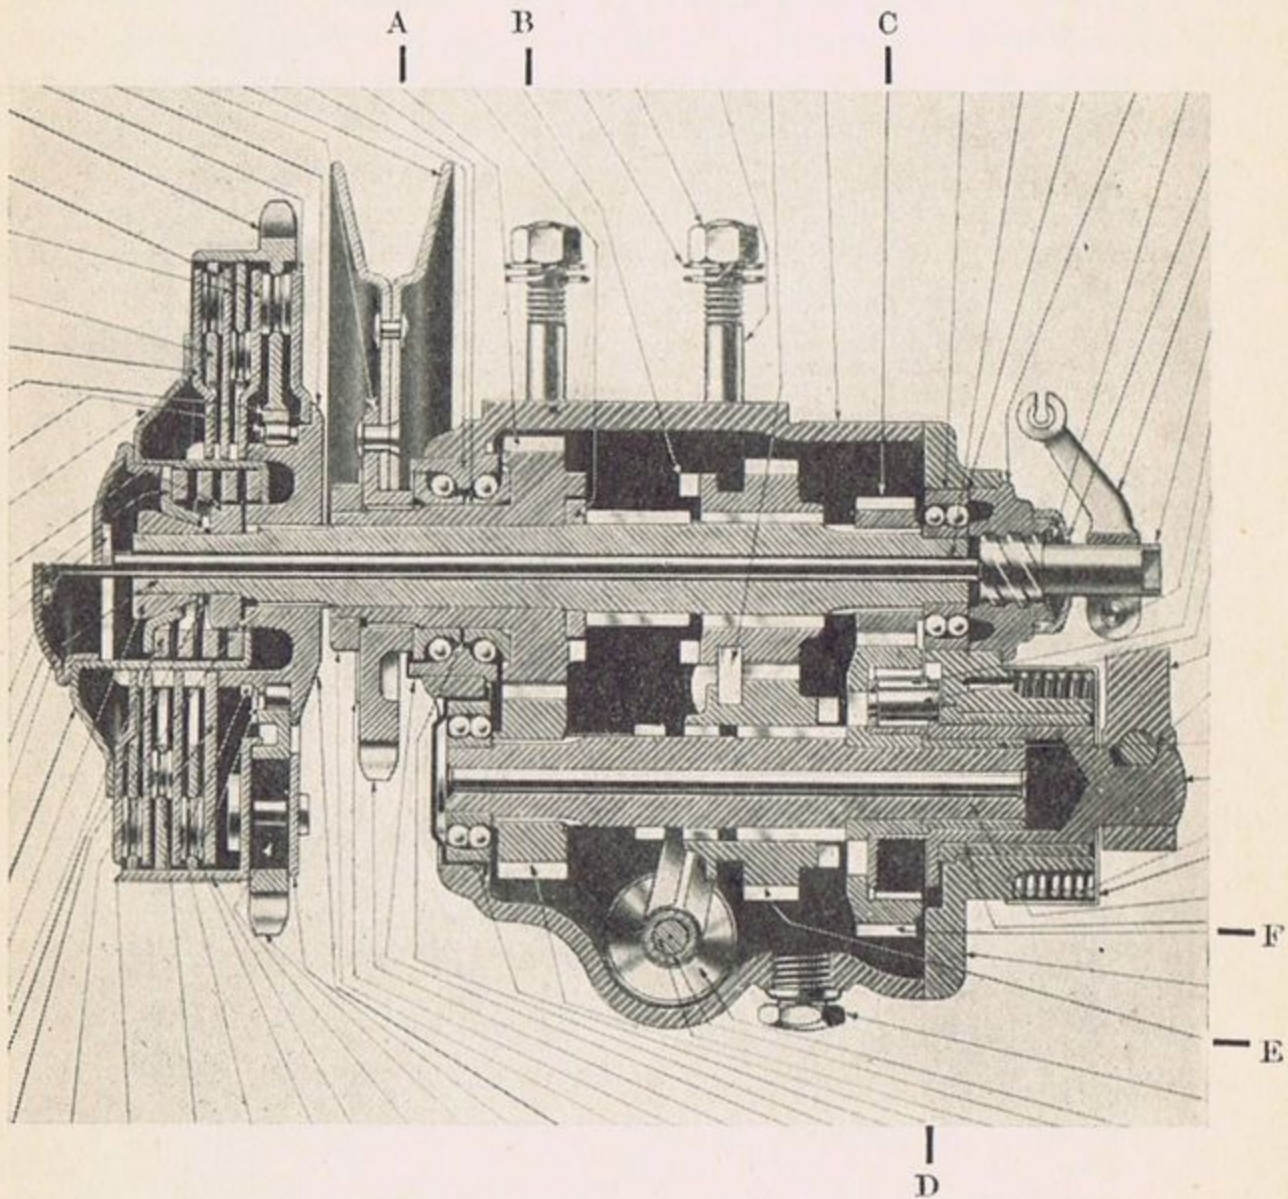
SECTIONAL VIEW OF THE STURMEY-ARCHER THREE-SPEED COUNTERSHAFT GEAR
